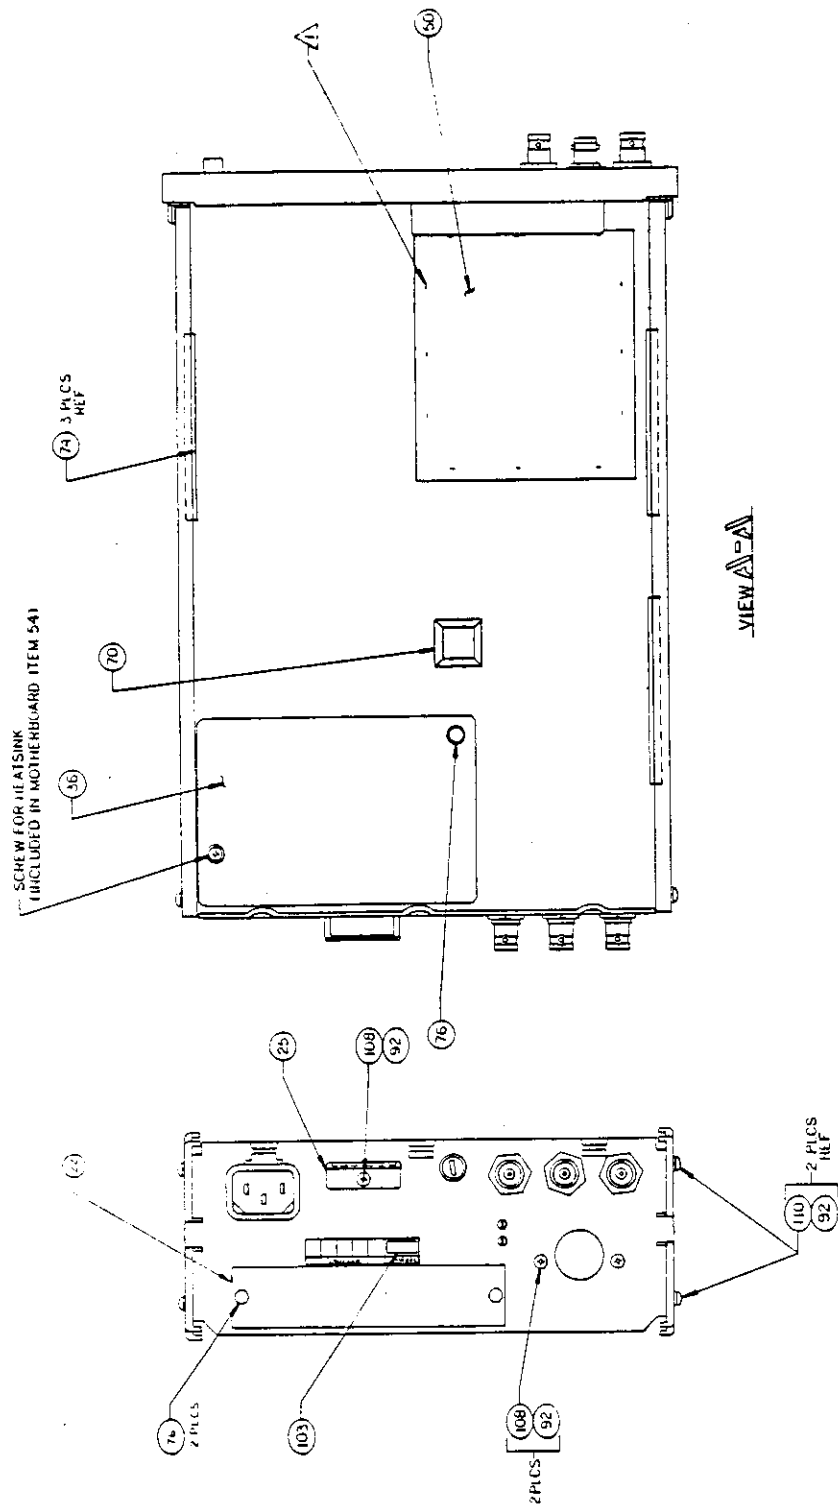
B - Chassis Assembly, 1991 (404576) (Cont'd)
